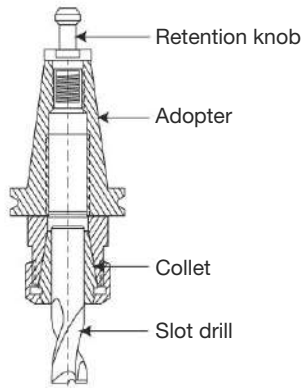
Complete tool assembly (for parallel shank tooling) as used in a CNC machining centre
